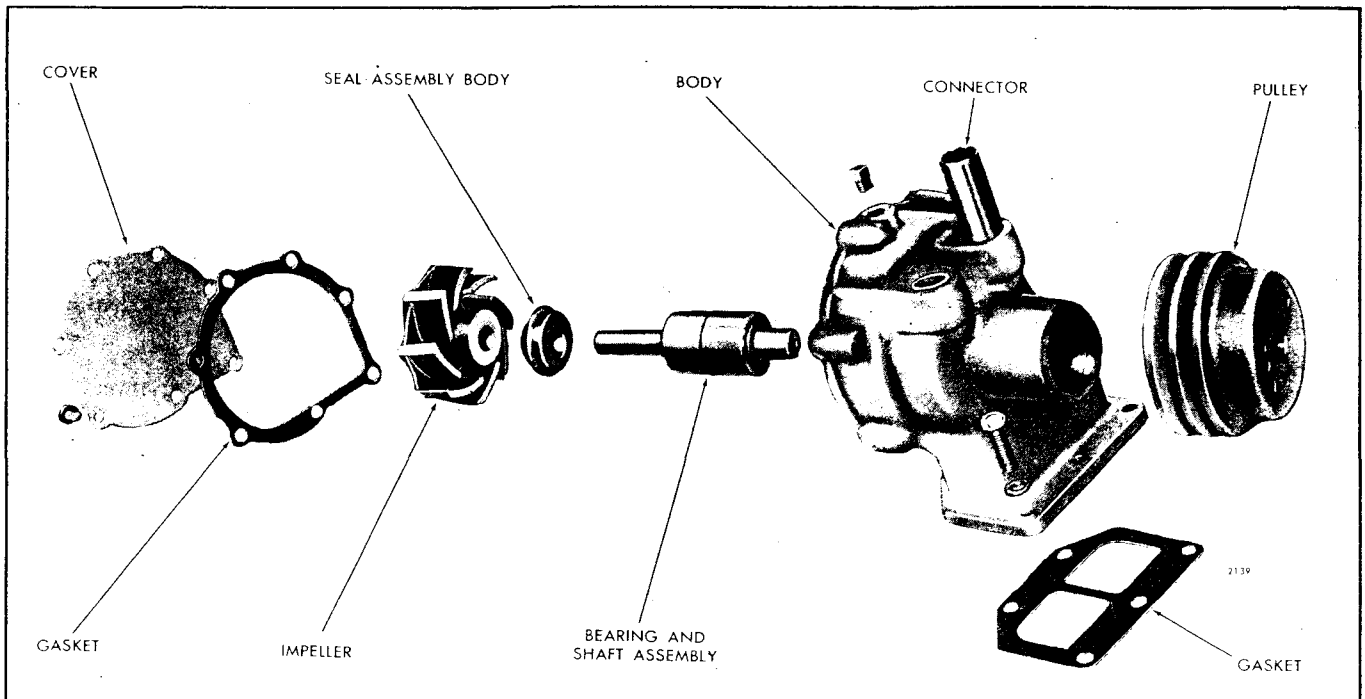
Fresh Water Pump Details and Relative Location of Parts
